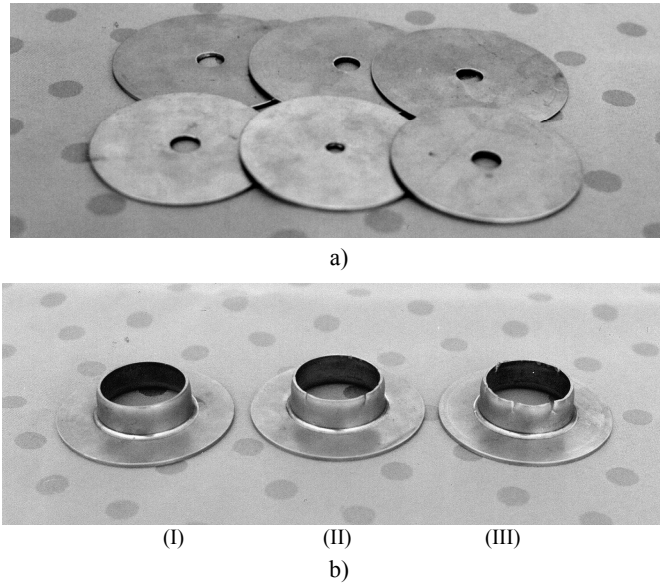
Outlook of the Specimens before (a) and after Hole-Flanging (b):
